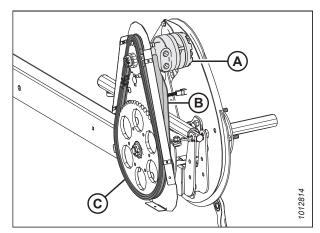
Single-Reel Drive Shown – Double Reel Similar
